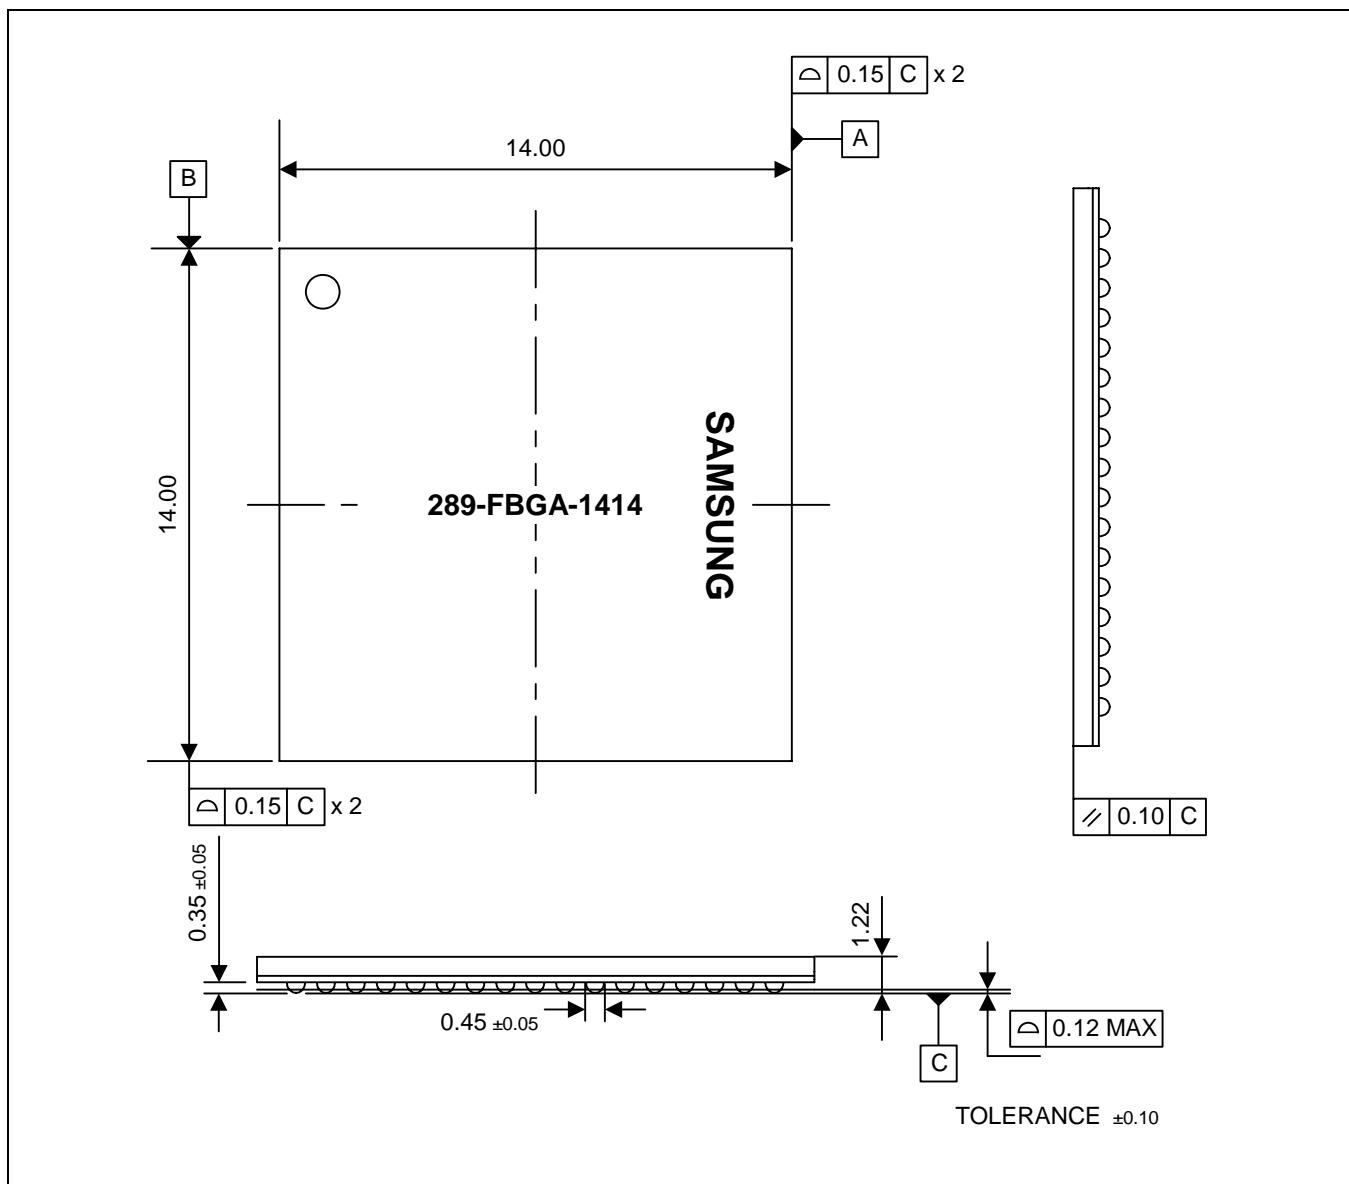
289-FBGA-1414 Package Dimensions 1 (Top View)
